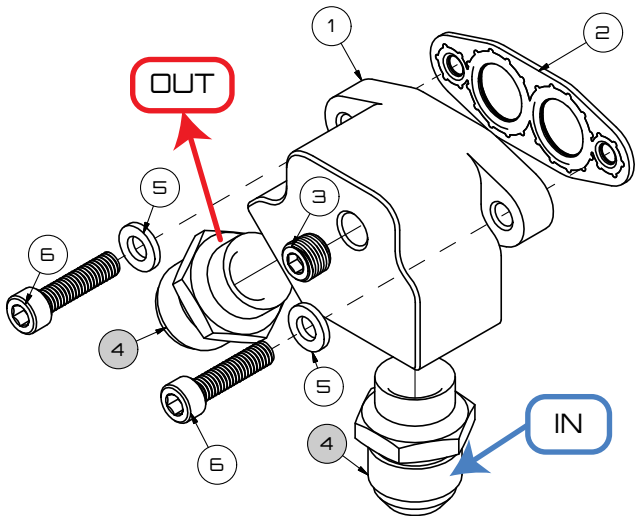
Rear Sump Assembly, Parts & Plumbing
